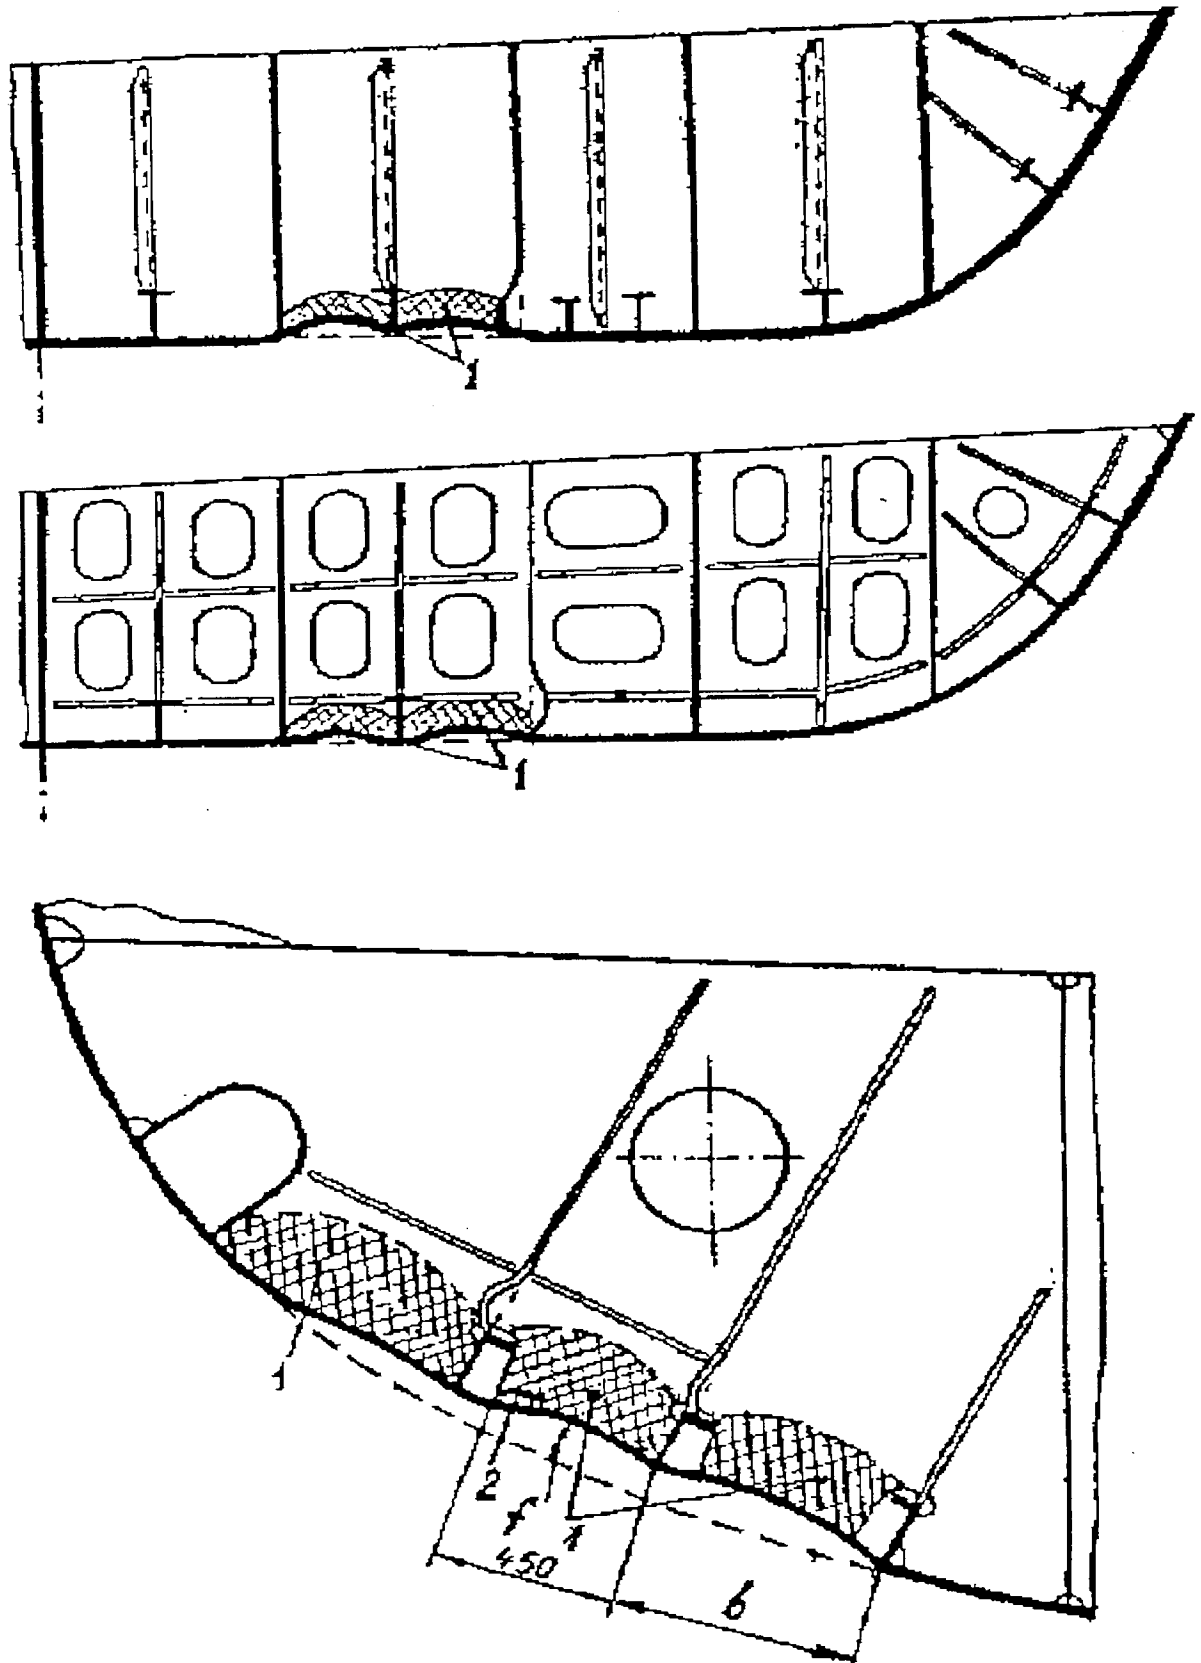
Typical damages to bottom framing walls of icebreakers of "Moskva" and "Ermak" types
